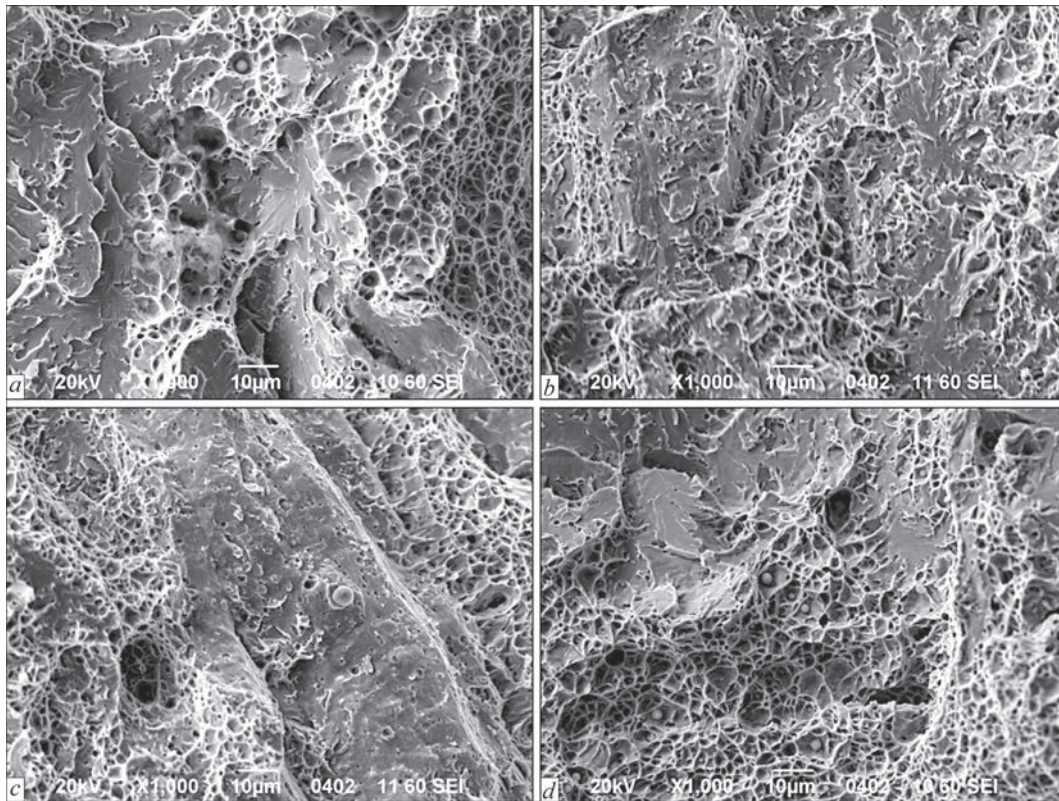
Fractographies of fractures of specimens: *a* — FeTi; *b* — TiC; *c* — TiN; *d* — TiO₂
